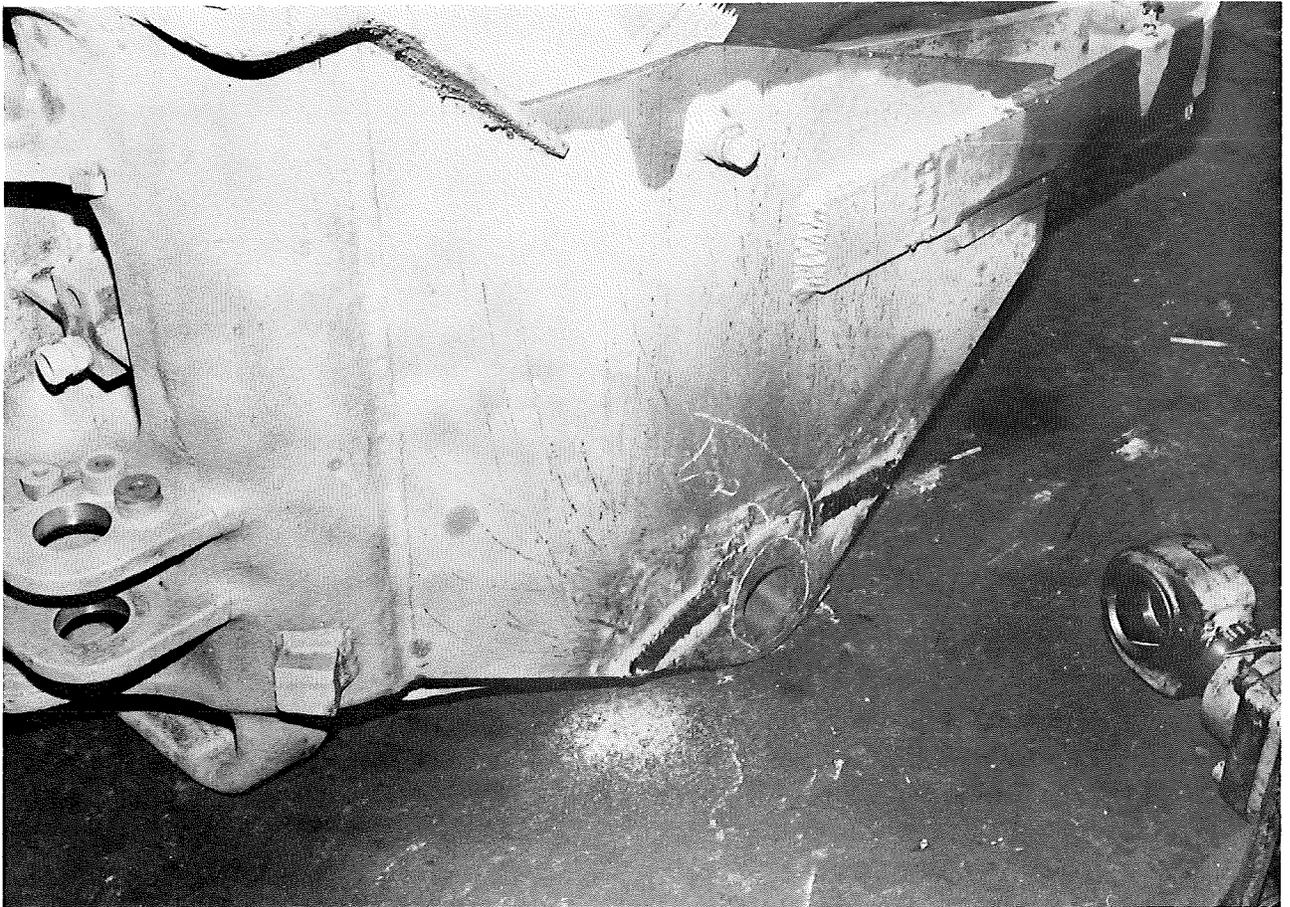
Weld repair of buckets is very common practice. Most mine maintenance shops keep in inventory the necessary bucket parts as shown in Figure 20 for quick weld repair.
